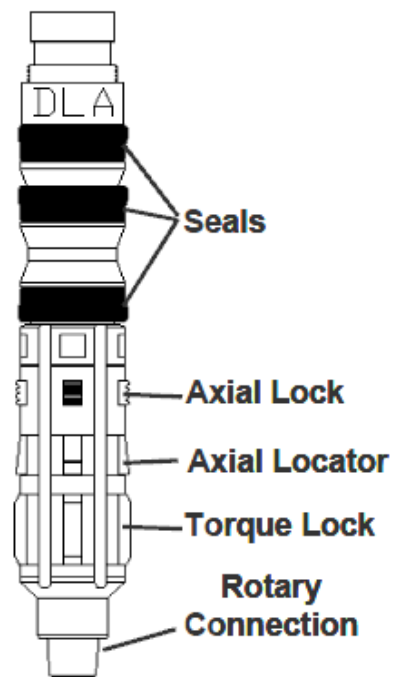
Drill-lock-assembly (DLA), (Warren et al., 2003)
